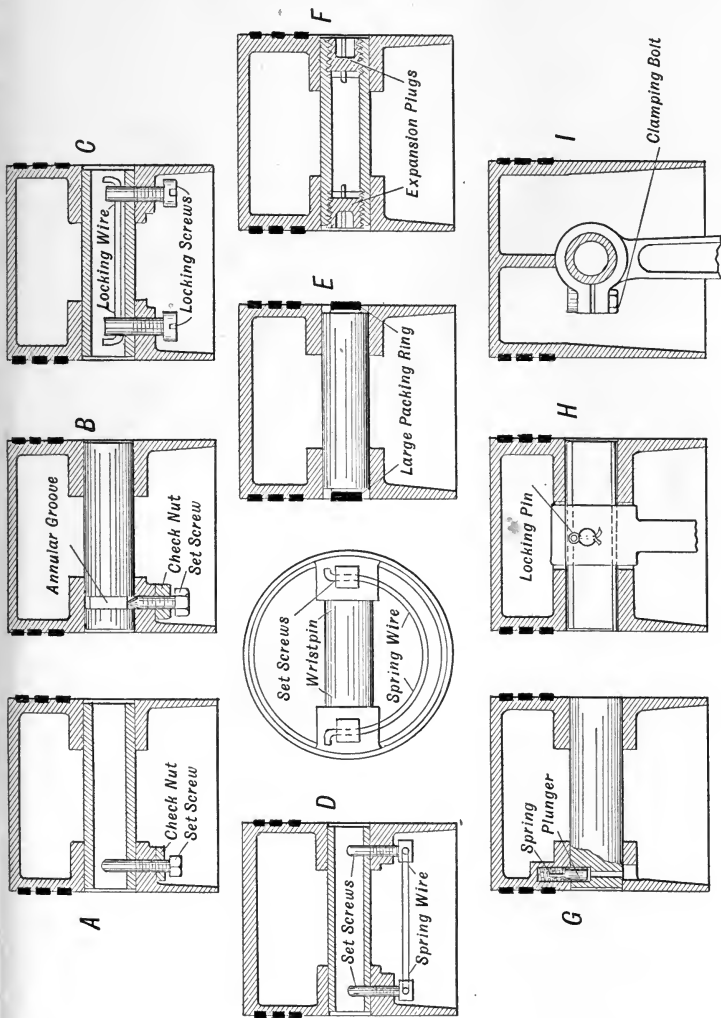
Typical Methods of Piston Pin Retention Generally Used in Engines of American Design. A—Single Set Screw and Lock Nut. B—Set Screw and Check Nut Fitting Groove in Wrist Pin. C, D—Two Locking Screws Passing Into Interior of Hollow Wrist Pin. E—Split Ring Holds Pin in Place. F—Use of Taper Expanding Plugs Outlined. G—Spring Pressed Plunger Type. H—Piston Pin Pinned to Connection Rod. I—Wrist Pin Clamped in Connecting Rod Small End by Bolt.
